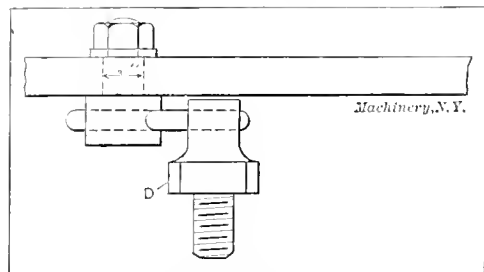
Detail of Clamping Device for Fixture shown in Fig. 5
